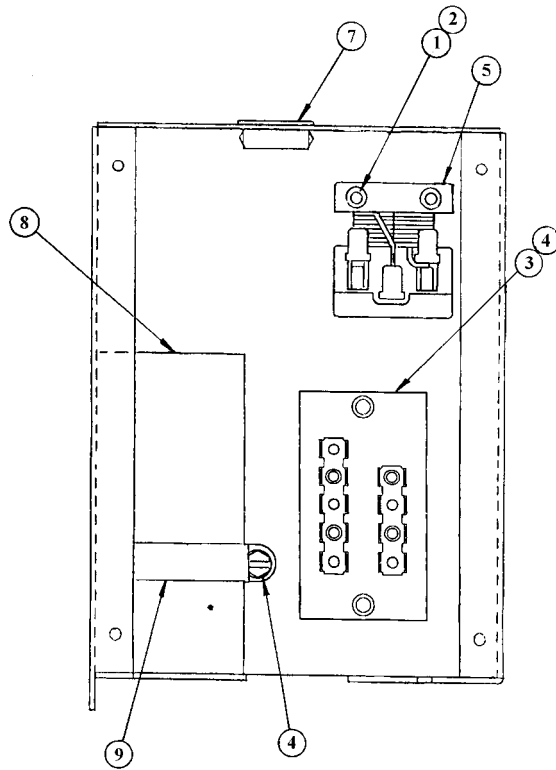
COMPRESSOR ELECTRICAL BOX ASSEMBLY AND PARTS LIST IMD 602-30
